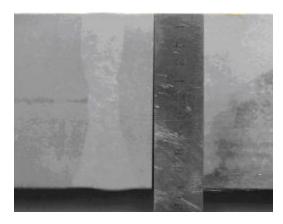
The cross section of weld specimen in the test plate (100 mm)
